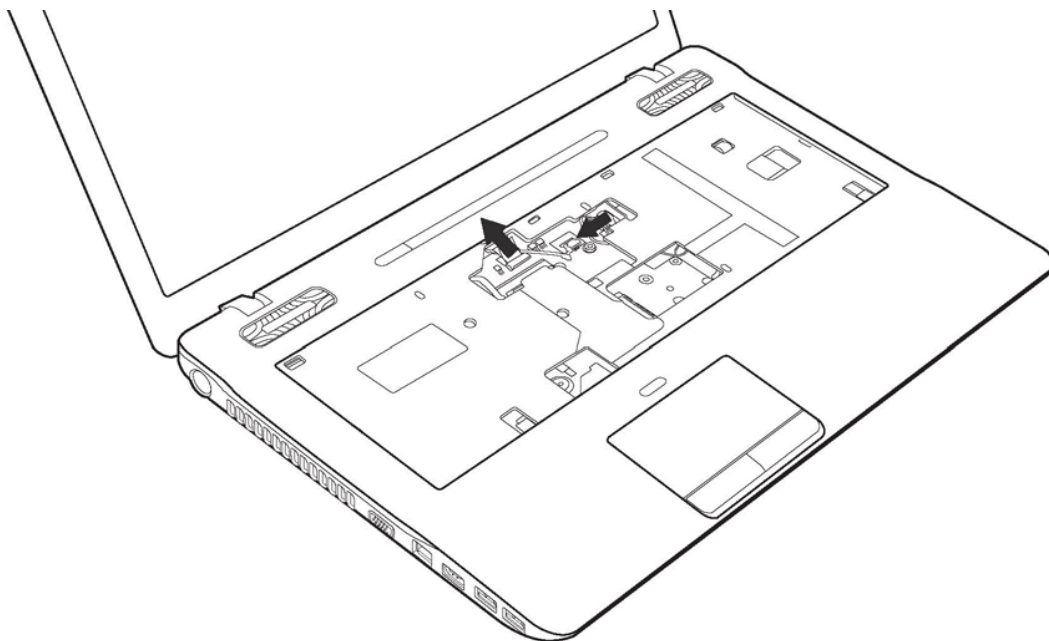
Disconnecting touchpad FFC and speaker cable from the motherboard
